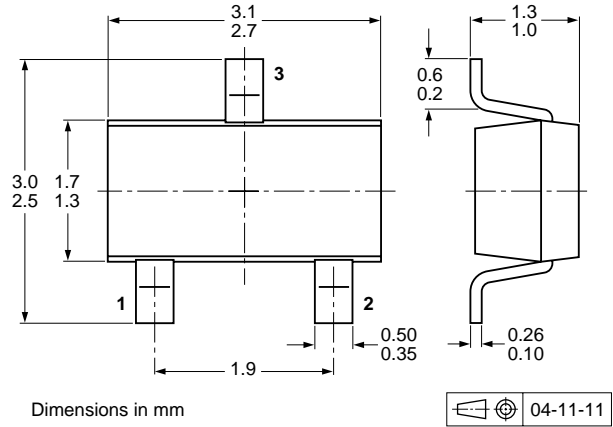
Package outline SOT346 (SC-59A/TO-236)
